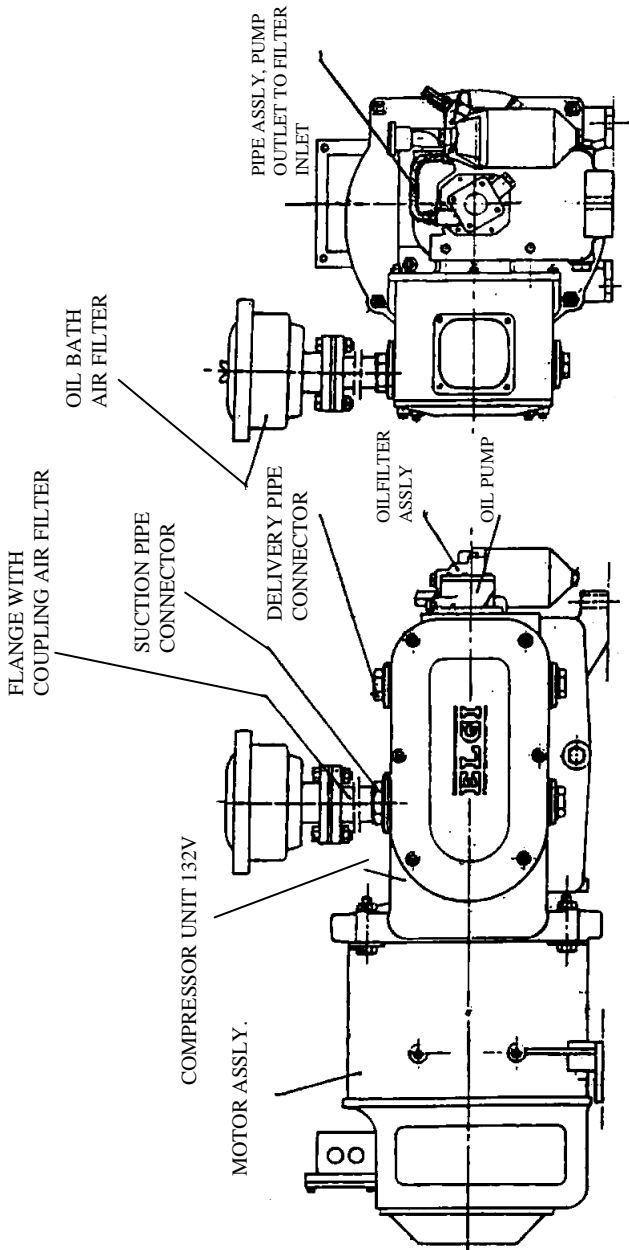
ELGI AIR COMPRESSOR ASSEMBLY
